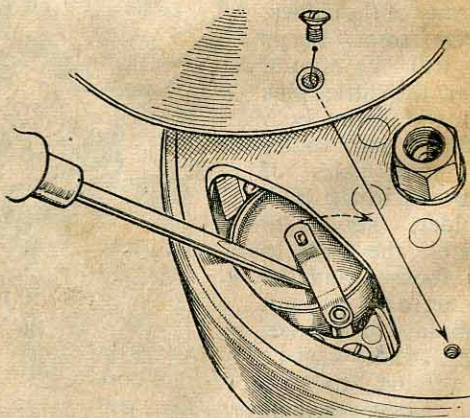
Screws secure the magneto cover plate. The clip which holds the cover of the Villiers contact-breaker housing can easily be prised upwards with a screwdriver blade
